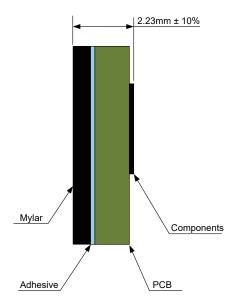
Maximum Module Thickness for Stack-Up B. PCB + 3M Double Sided Adhesive and Mylar Overlay
